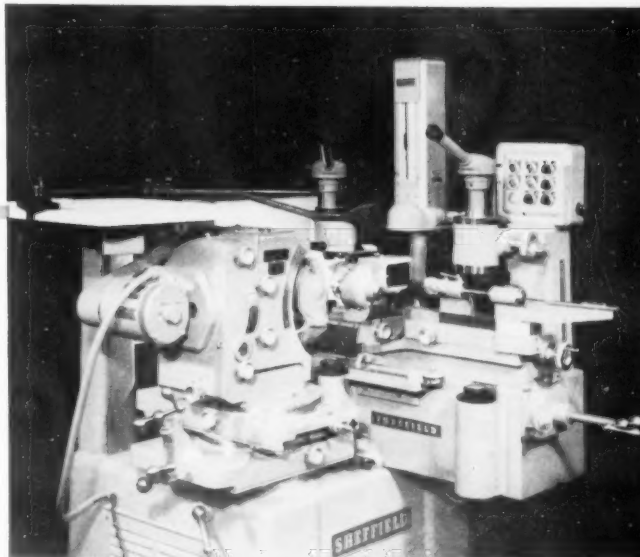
Optical methods are used for match grinding of servo valve spools. Spool is viewed in left-hand microscope; microscope at right gives view of matching sleeve. Air gauge measures stock removal during correcting operations.
